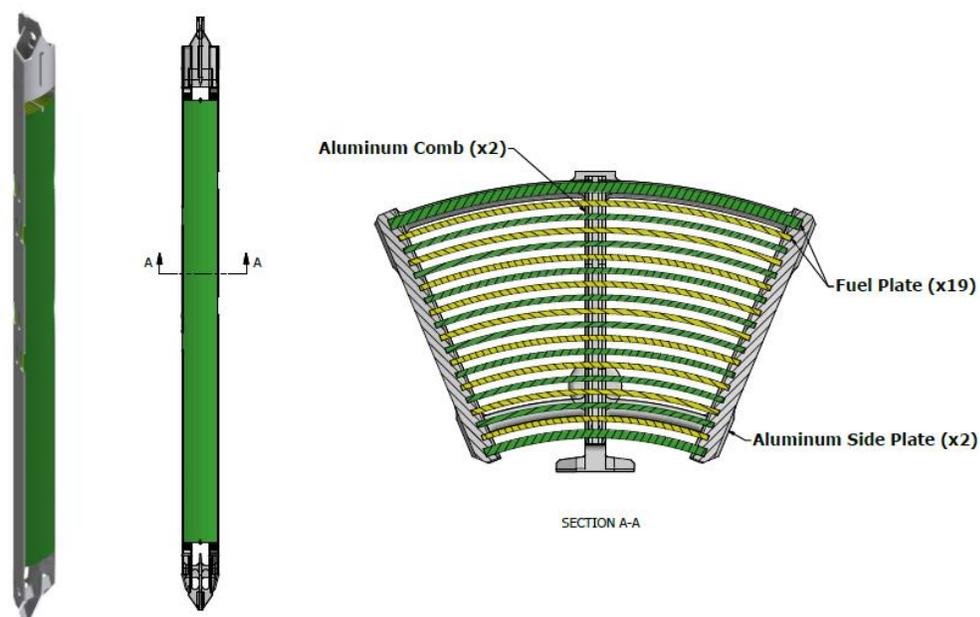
Isometric view of Mark-VII fuel assembly (left); Cross-section schematic of Mark-VII fuel assembly (right)
